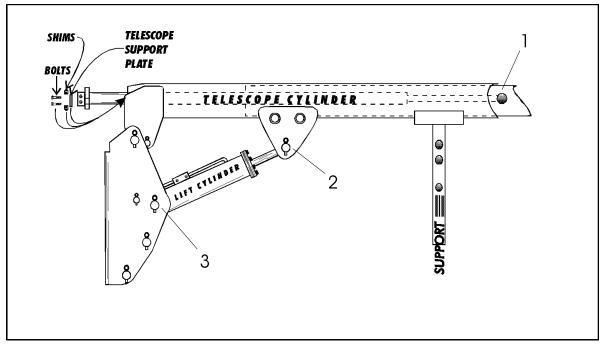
Location of Components - Telescope and Lift Cylinder
